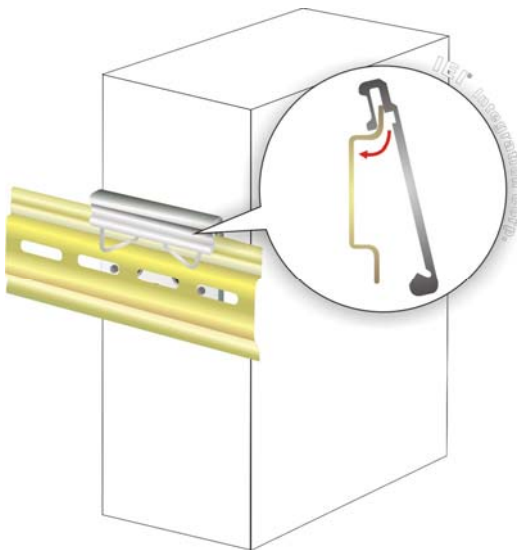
DIN Rail Mounting Bracket Installation
